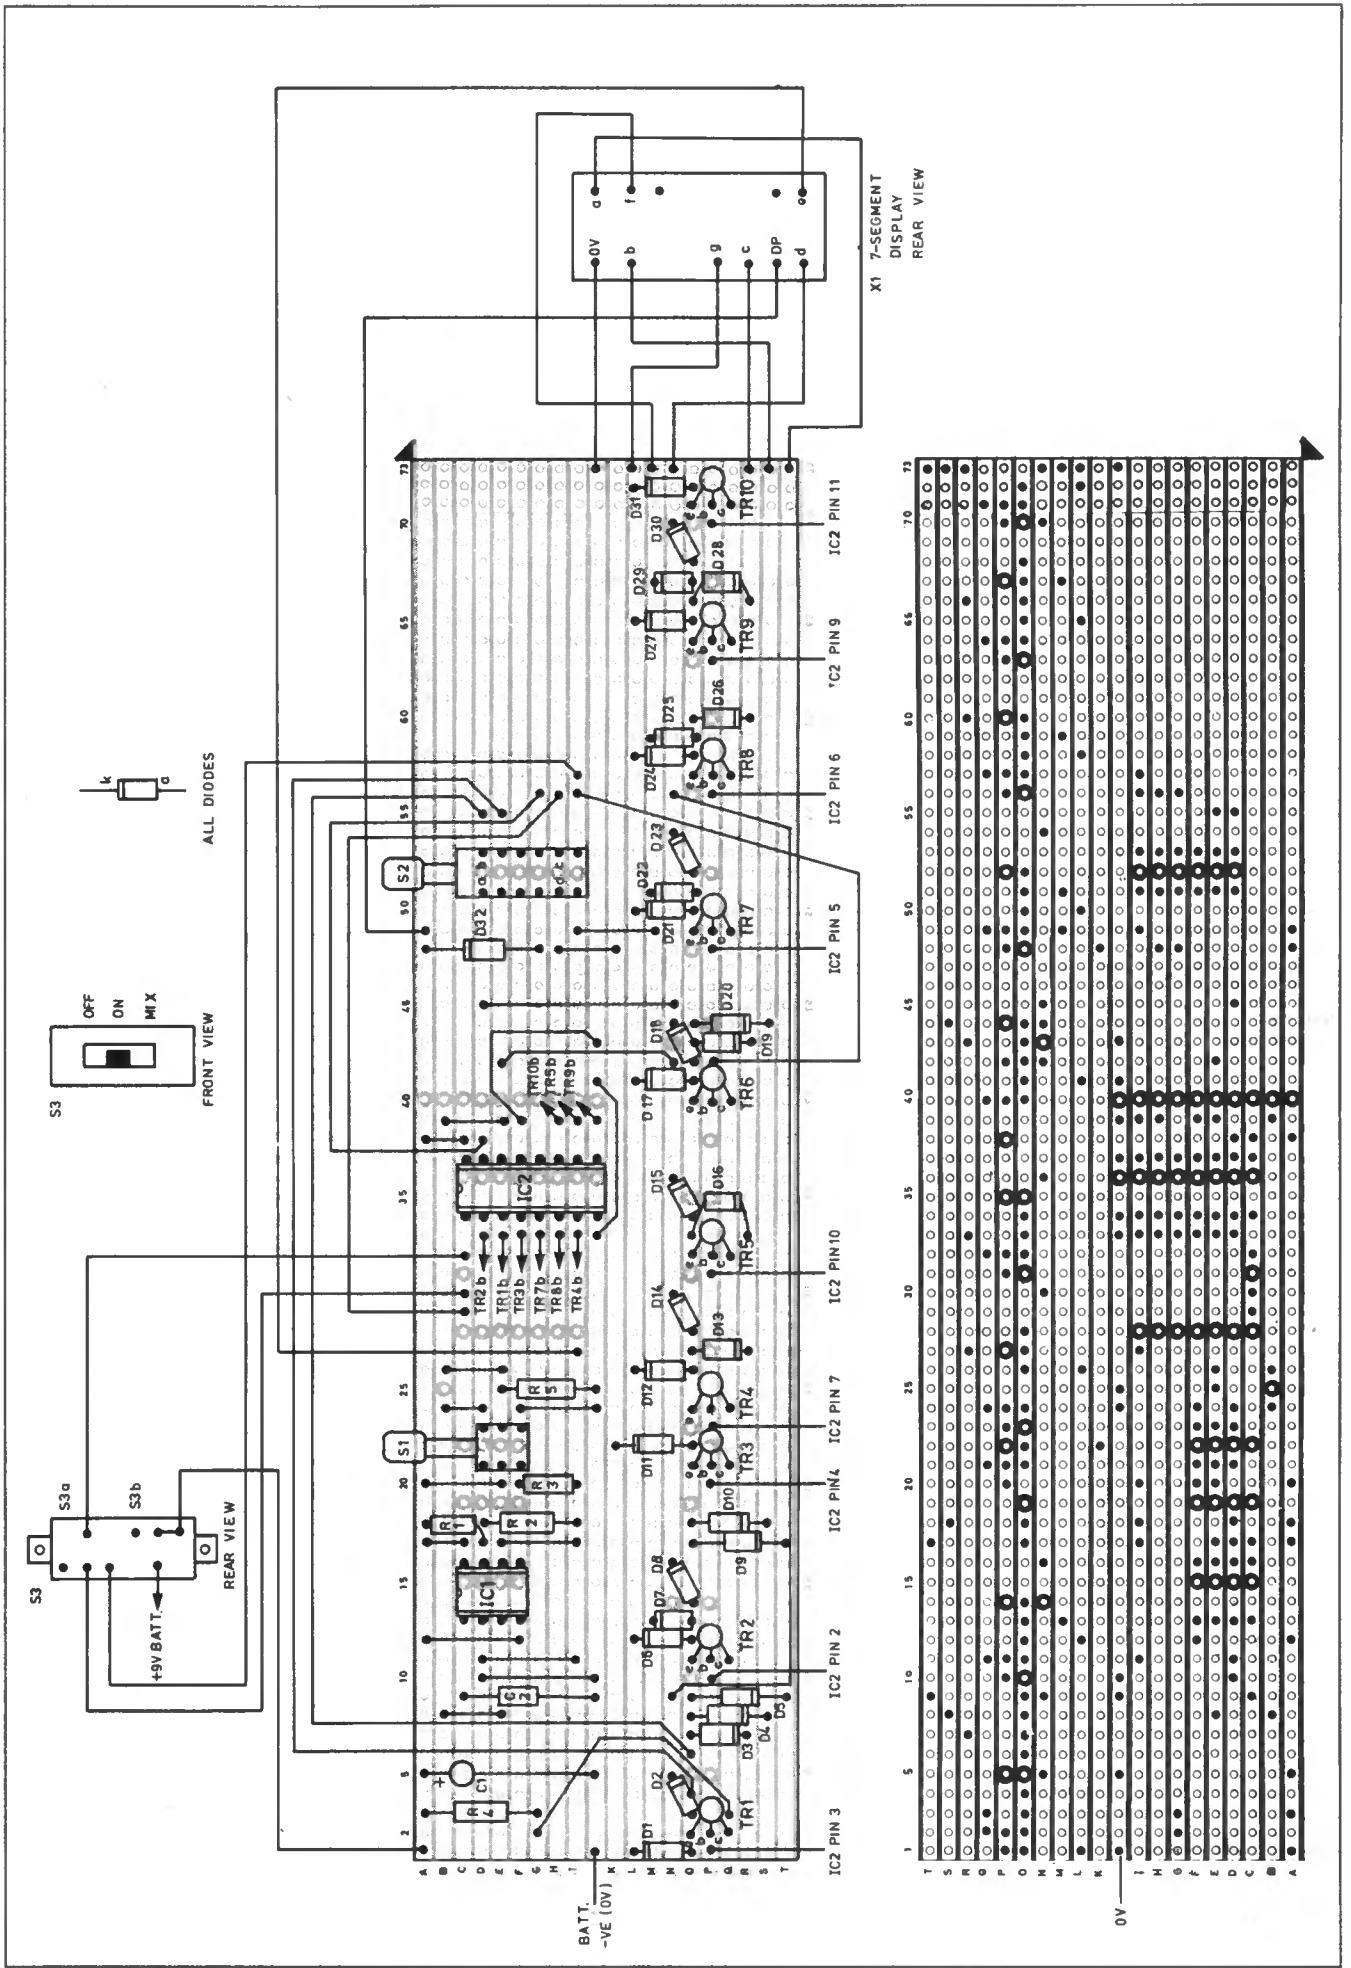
Topside component layout and underside stripboard track cuts and solder joints for the Counterspell.
